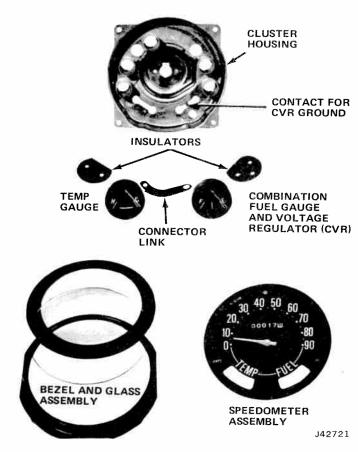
Instrument Cluster Assembly - CJ Models
